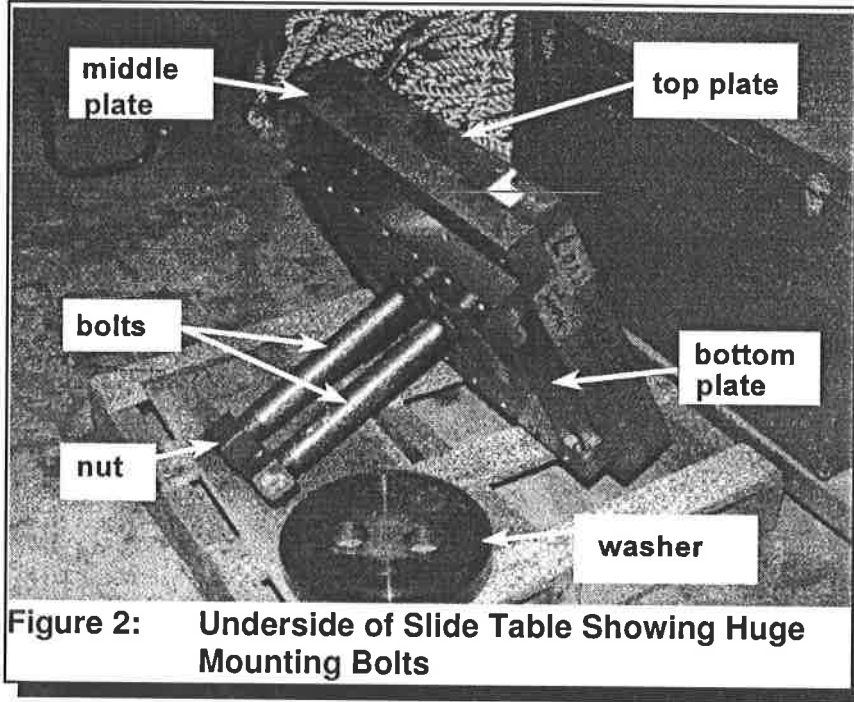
Underside of Slide Table Showing Huge Mounting Bolts
